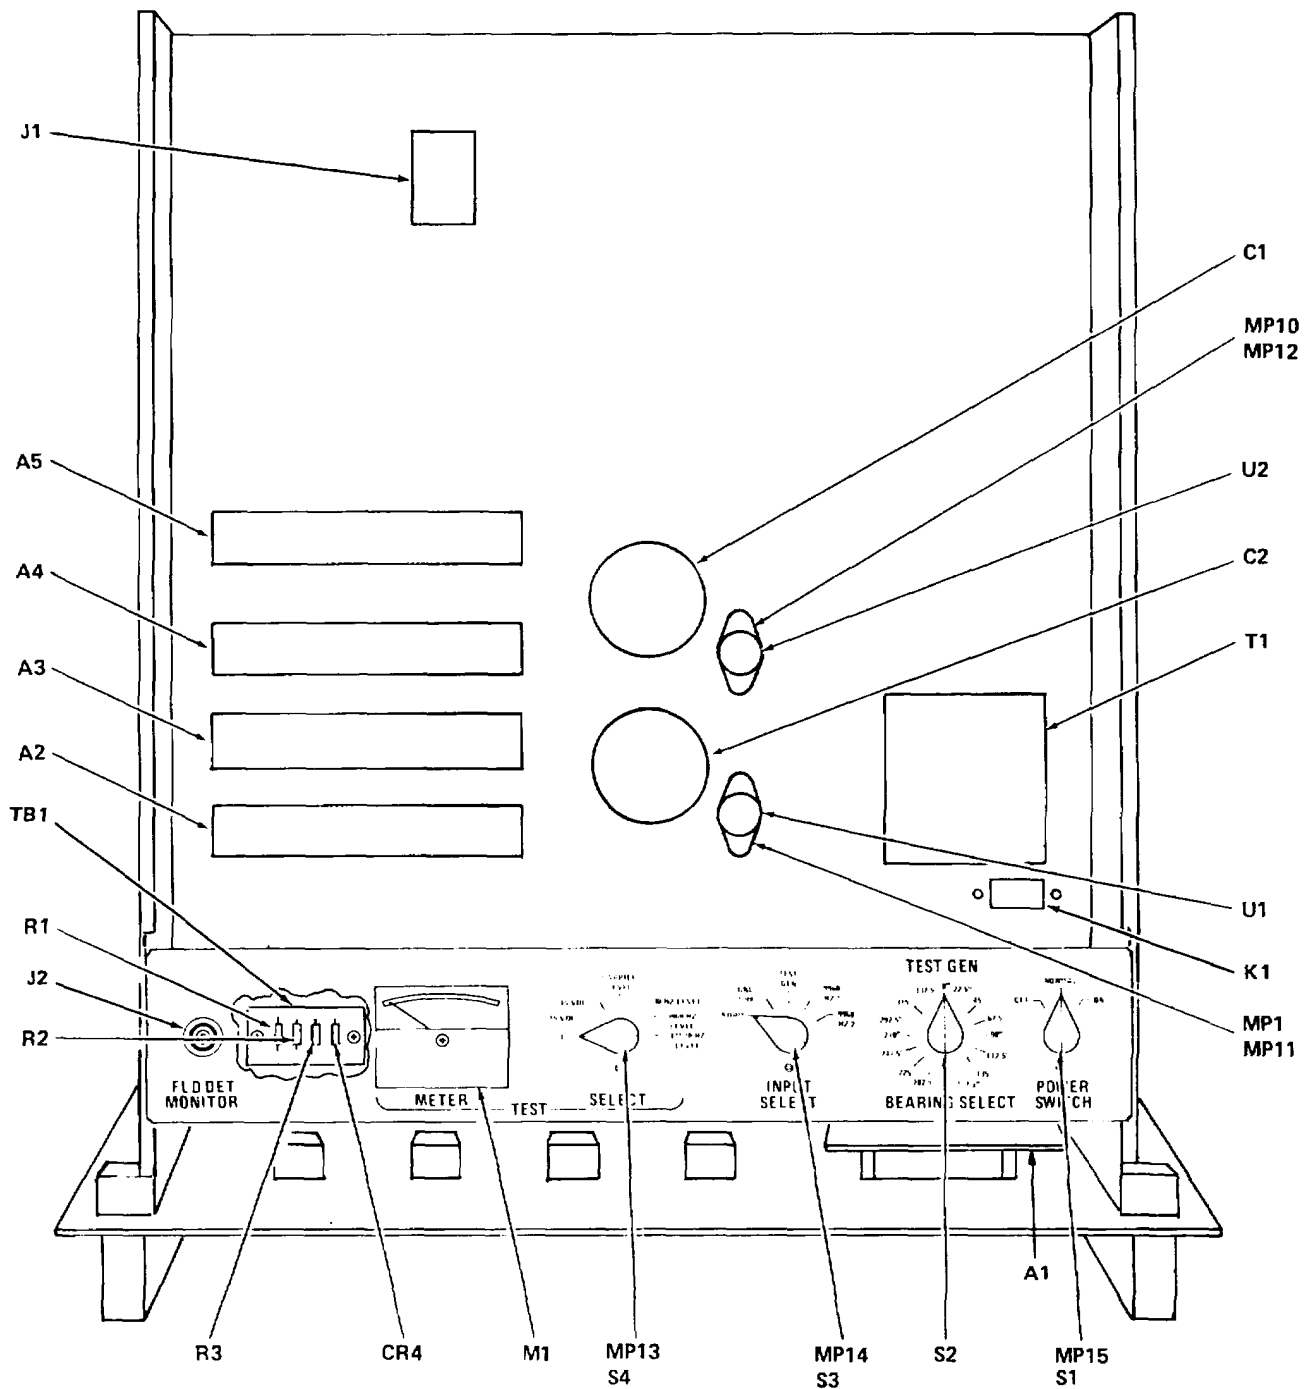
Monitor Front Panel and Chassis-Mounted Parts Location Diagram (Sheet 1 of 4)
